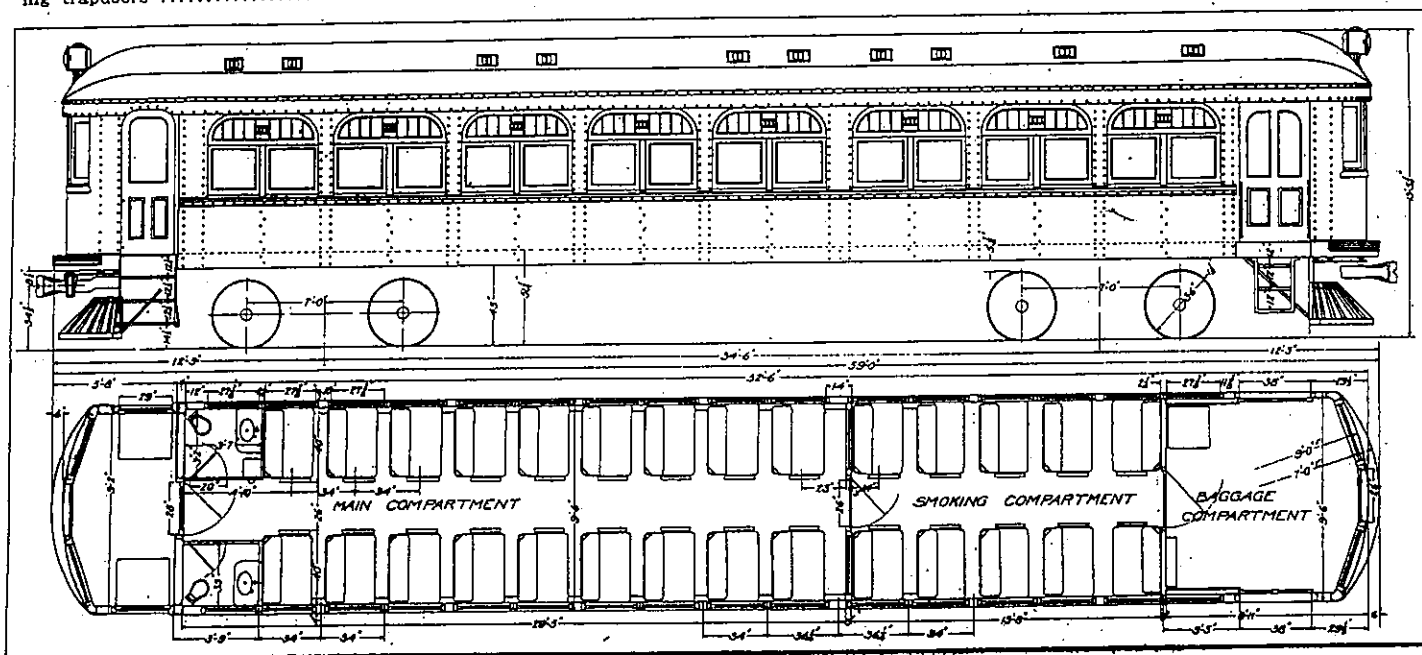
Plan and Elevation of All Steel Motor Cars for London & Port Stanley Railway.
